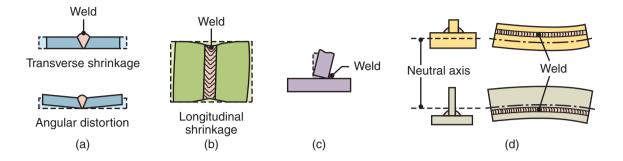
Distortion of parts after welding. Distortion is caused by differential thermal expansion and contraction of different regions of the welded assembly.
